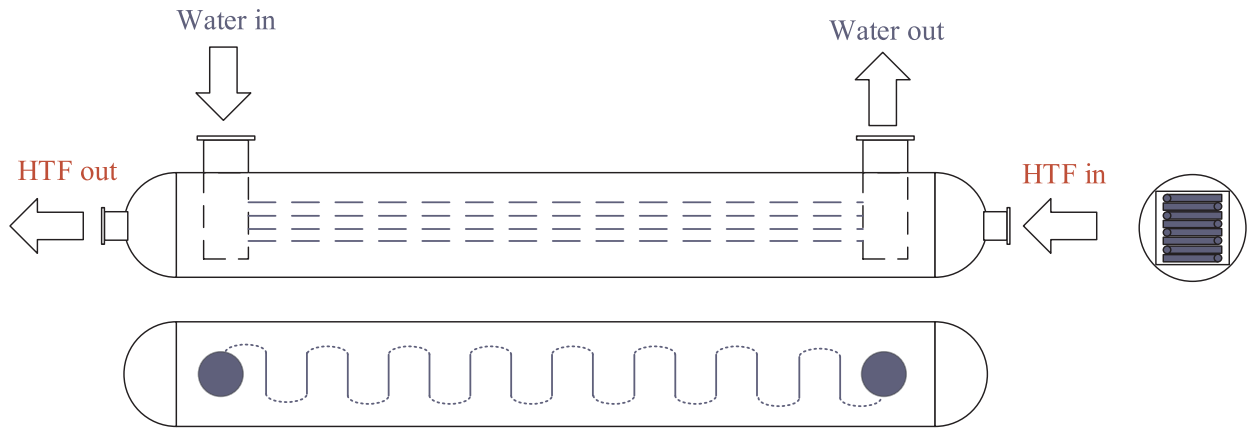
Header and coil shell single phase heat exchanger geometry.
